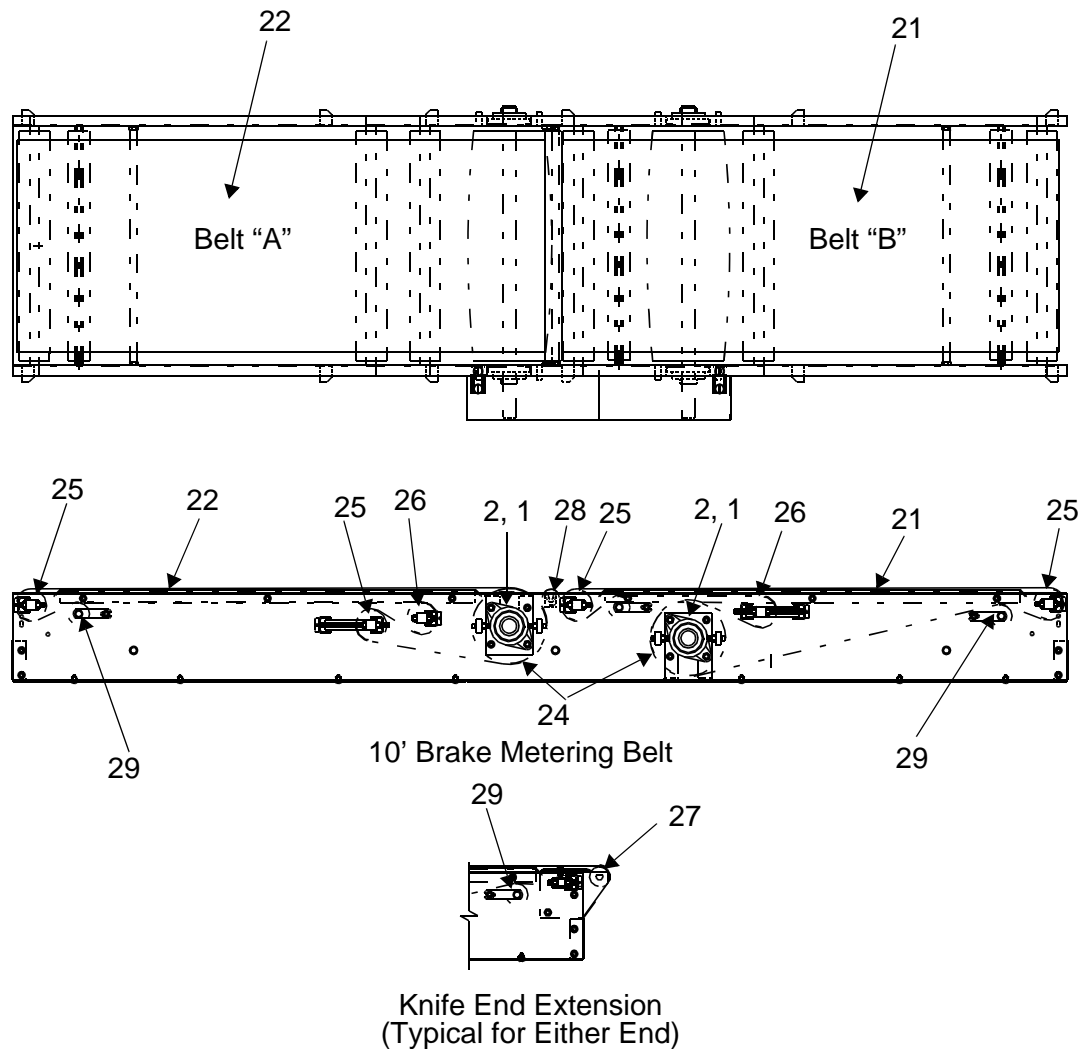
Brake Metering Belt - Top and Side View, and Knife End Extension
